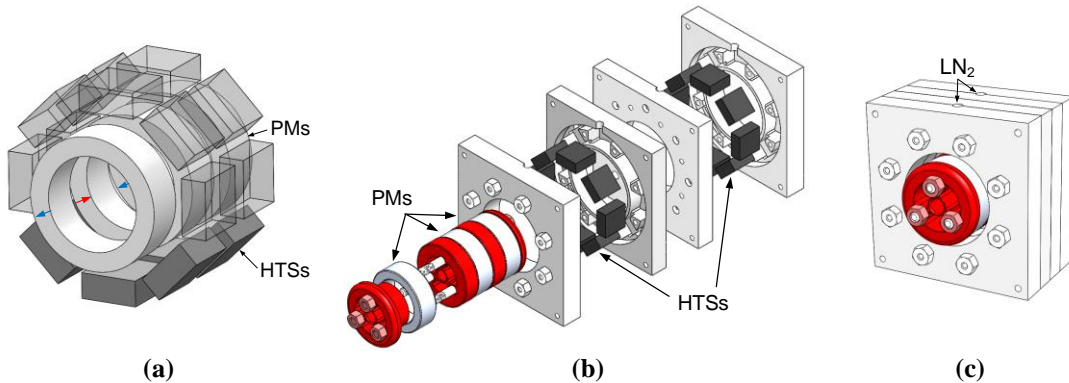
(a) Geometry of the studied bearing, (b) 3D exploded view design, and (c) assembly design of the experimental prototype.
